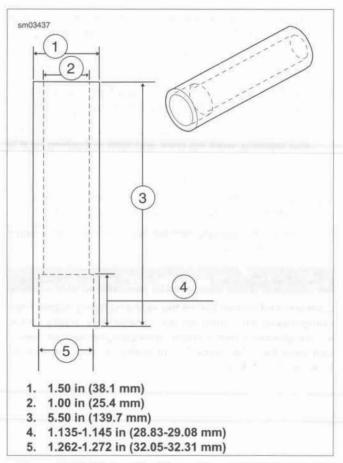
Pinion Shaft Inner Race Installation Tool
